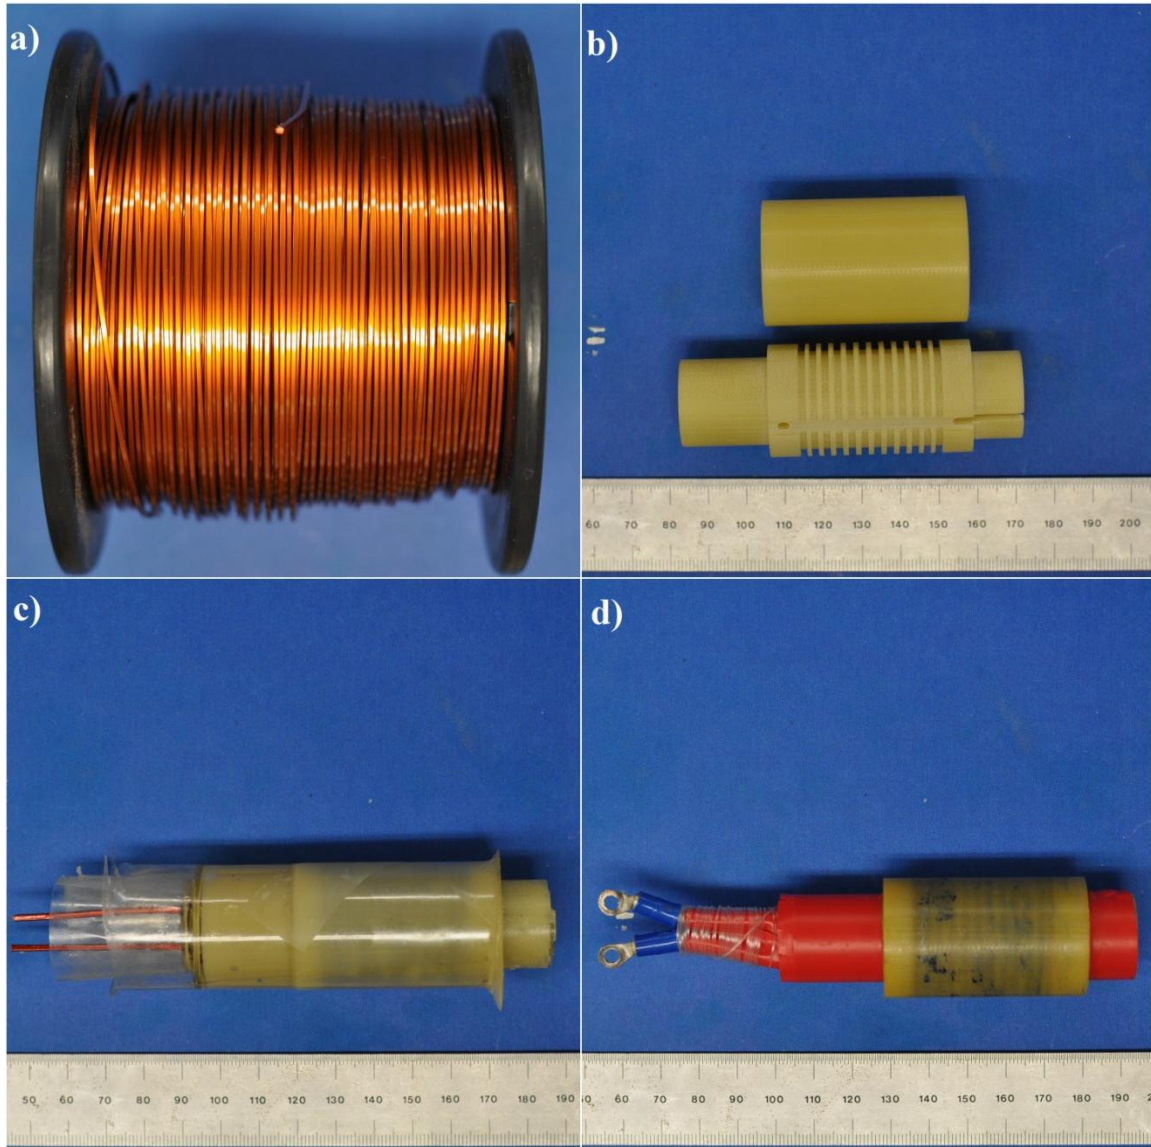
Sequence of 36 mm solenoid manufacture process. Images show a) 16-gauge square copper magnet wire spool b) 36 mm coil core and sleeve c) Epoxy covered 36 mm solenoid assembly d) Finished 36 mm solenoid.
